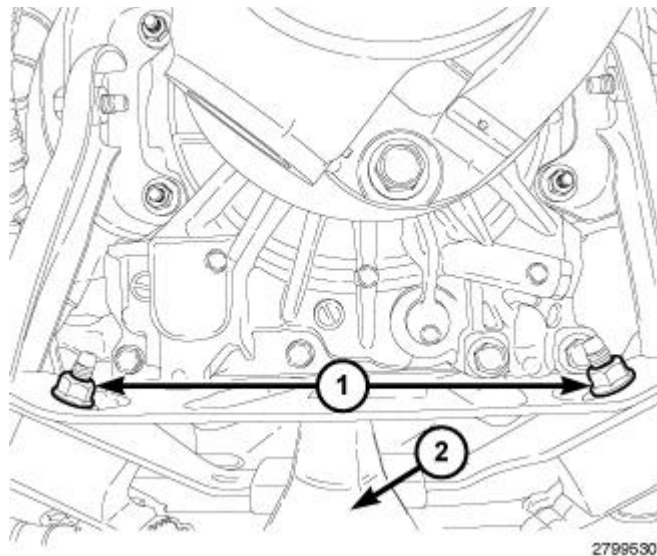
Identifying Rear Transmission Mount & Nuts - AS68RC A/T
